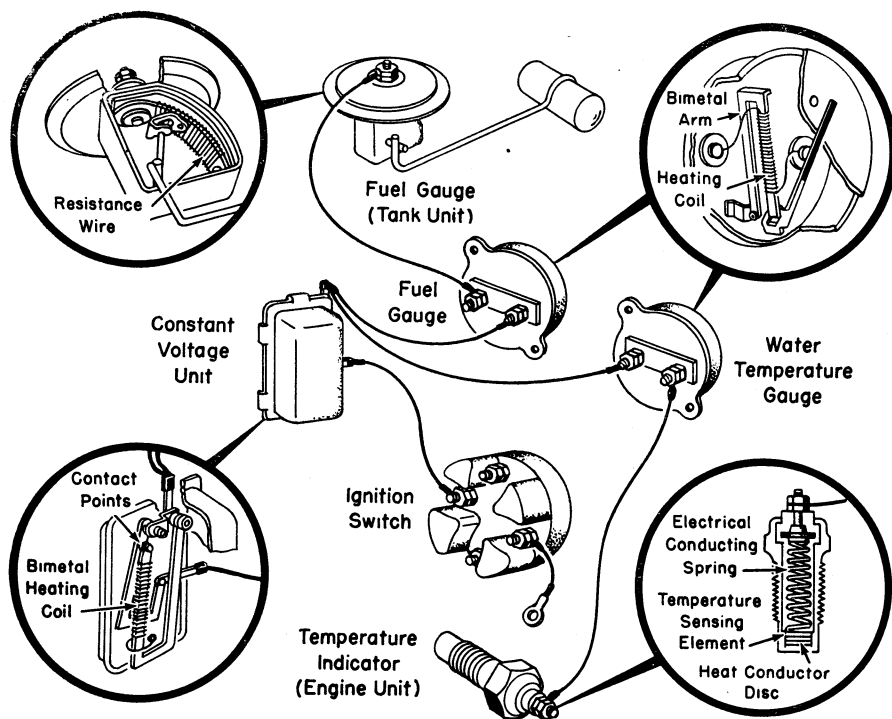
A Typical constant-voltage system with units enlarged to show their construction
